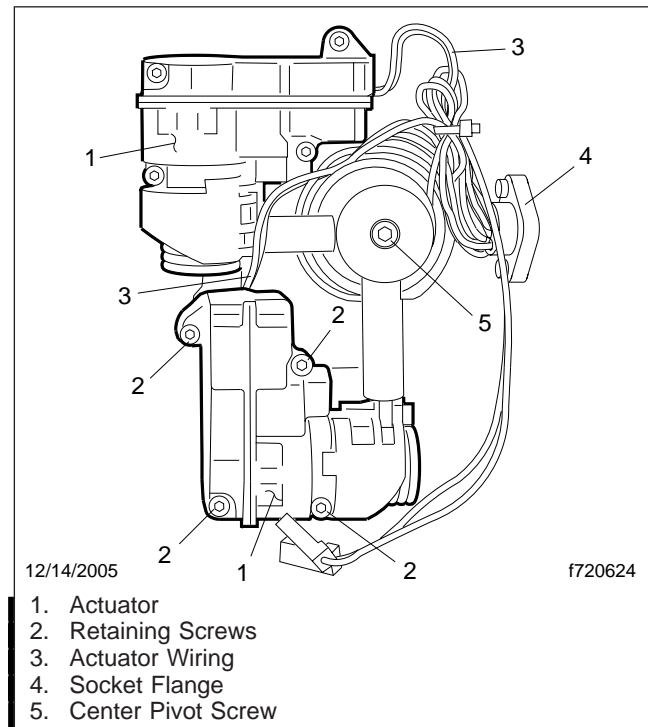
, Actuator Installation (Lang-Mekra West Coast)
